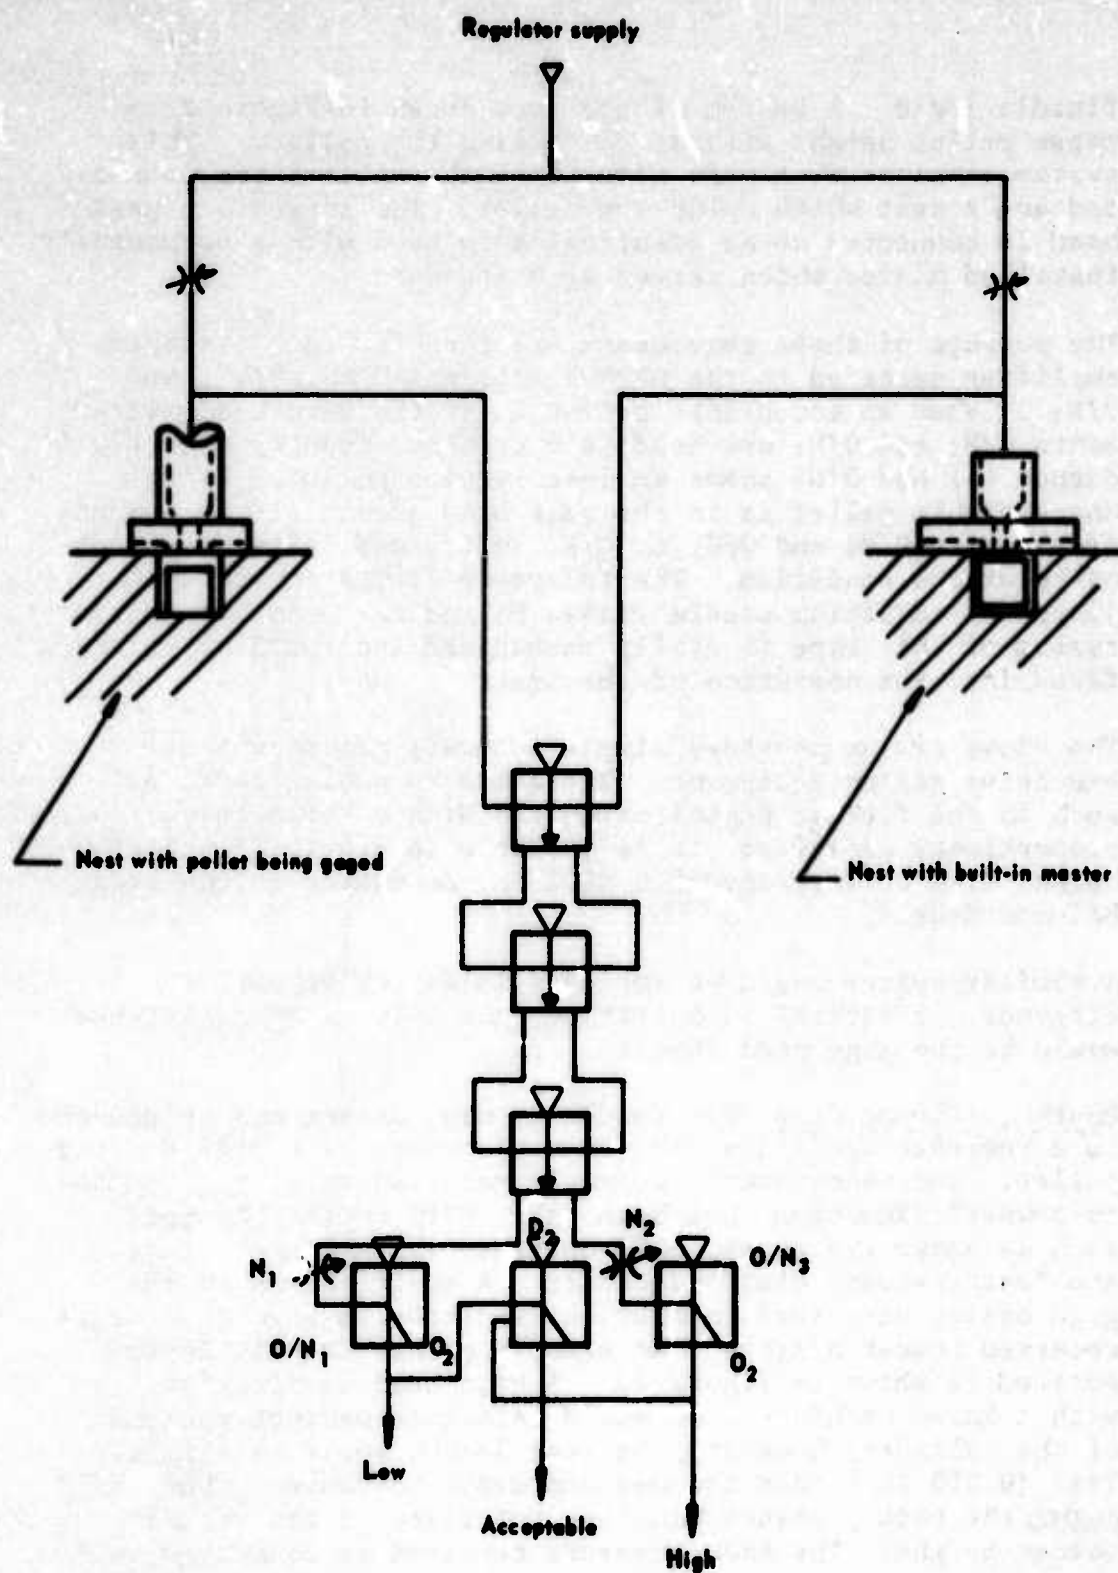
Gaging system for measurement of explosive pellet height.
